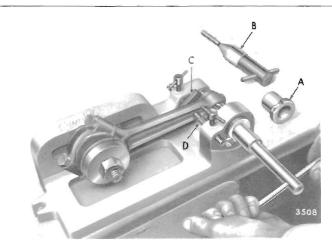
Reaming the gudgeon pin bush — using tool No. 6200B
